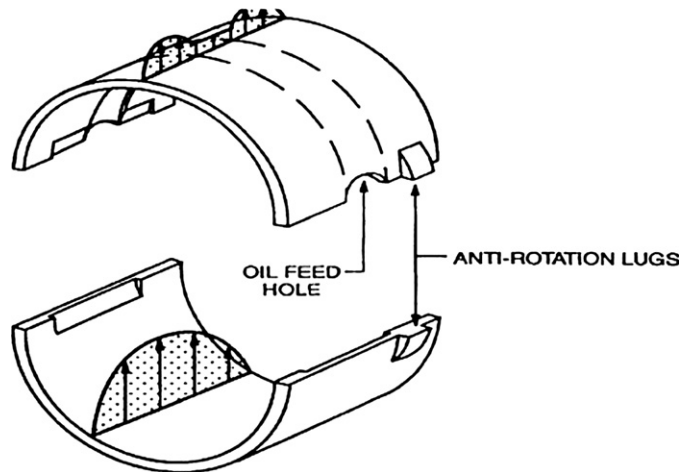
• Straight sleeve bearing liner (Courtesy of Elliott Co.)
